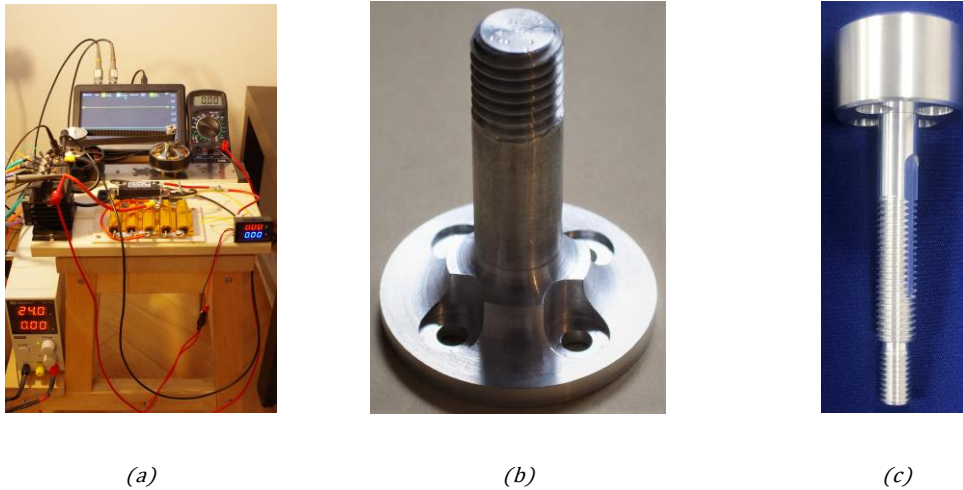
Torque transferring experiment, (a) setup, (b) and (c) originally manufactured parts
